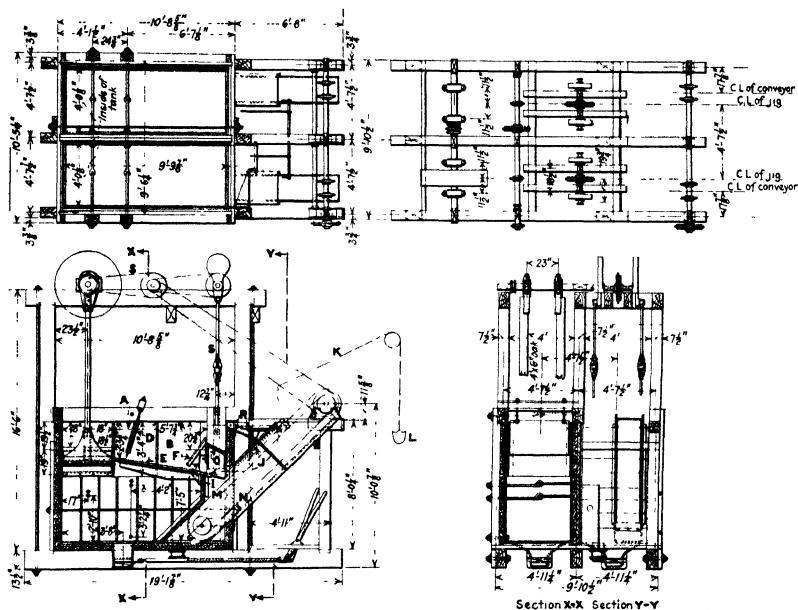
TENCH JIG OF HUDSON COAL CO.
